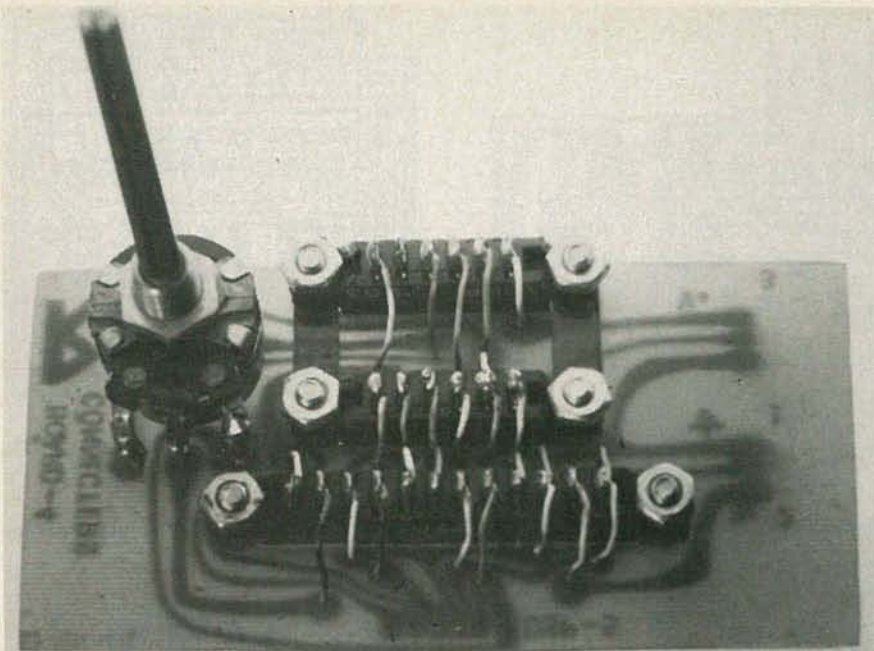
RESISTOR R48 and switch S1, a single unit, are soldered directly to board 4. That unit's mounting hardware is used to secure the board to the case.
